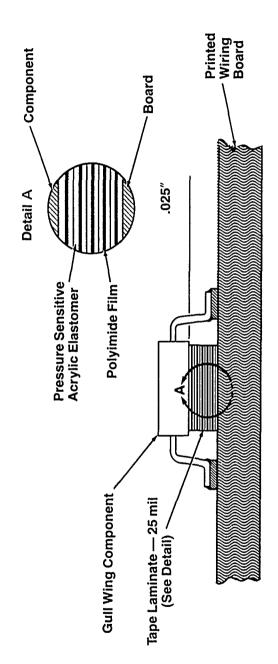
Mounting of a High Standoff Component Using a 5-Ply Lamination of Type I Tape.
